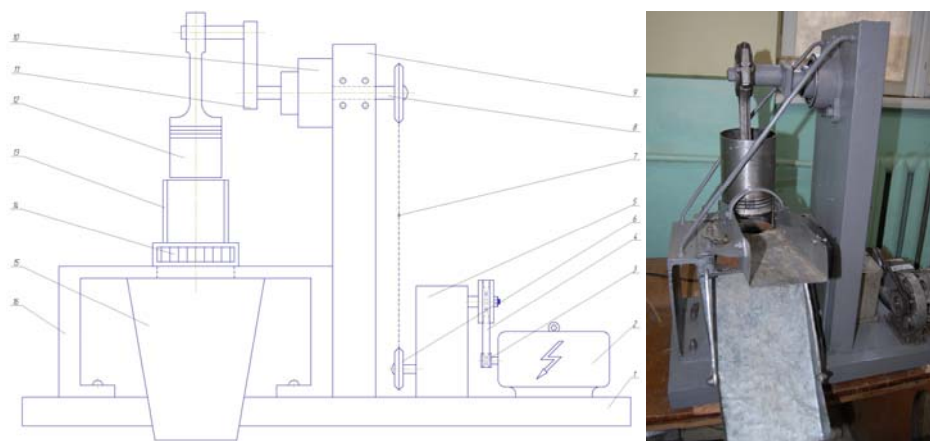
Drawing and general view of fruit slices shredder: 1 – base, 2 – electromotor, 3 – drive pulley of belt gear, 4 – belt, 5 – cylindrical reducer, 6 – drive star, 7 – chain, 8 – shaft, 9 – fixed member, 10 – bearing unit, 11 – crank, 12 – piston, 13 – working cylinder, 14 – knife cassette, 15 – container, 16 – working desk
